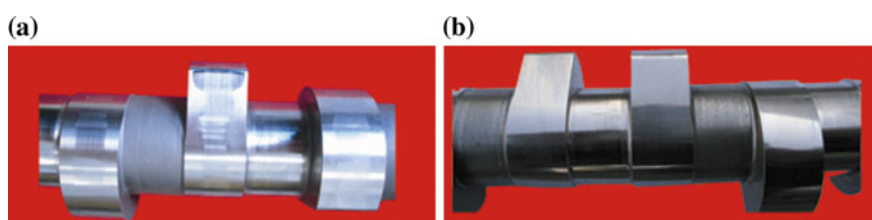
Comparison photographs of some military camshaft after finishing 350 h. a Before finishing; b after finishing
